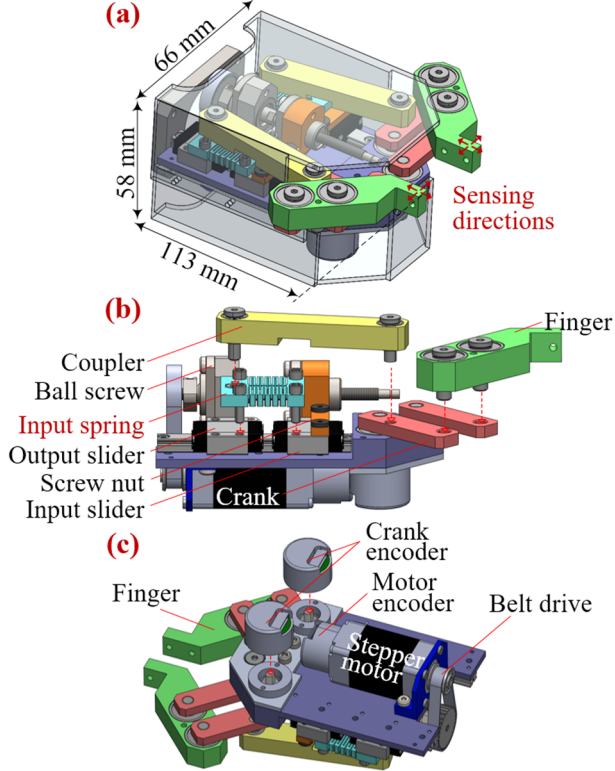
(a) Prototype of the force-controlled gripper (b) Top view (c) Bottom view
